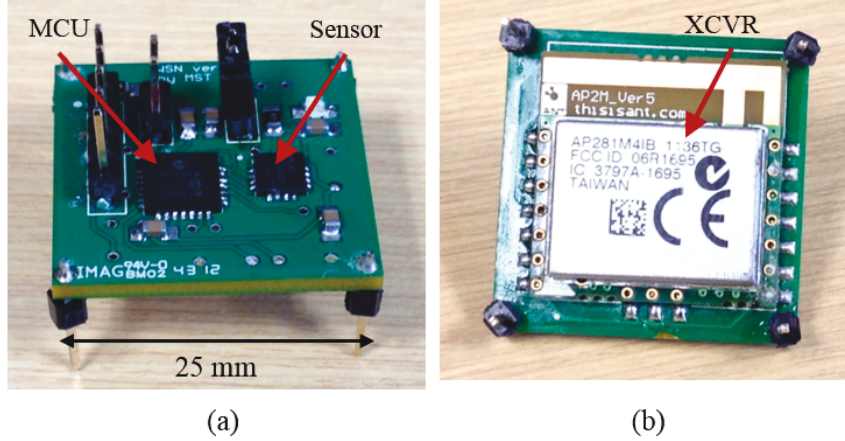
Photographs of the assembled wireless temperature sensor node from (a) top view and (b) bottom view.
